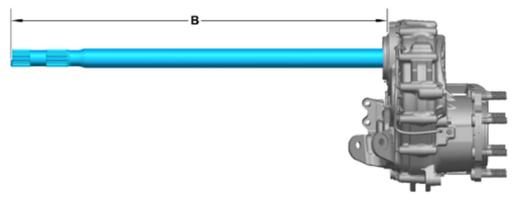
Right hub reduction gear, B installed dimension: 743.3 mm ±1.5 mm
